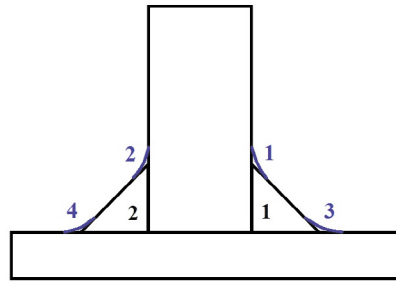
Welding and TIG-dressing operations sequence.
